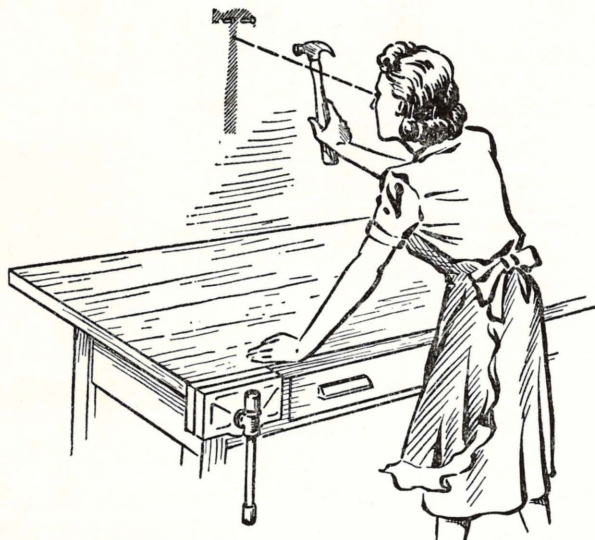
The shape of the tool painted on the tool panel will help to keep tools where they belong
